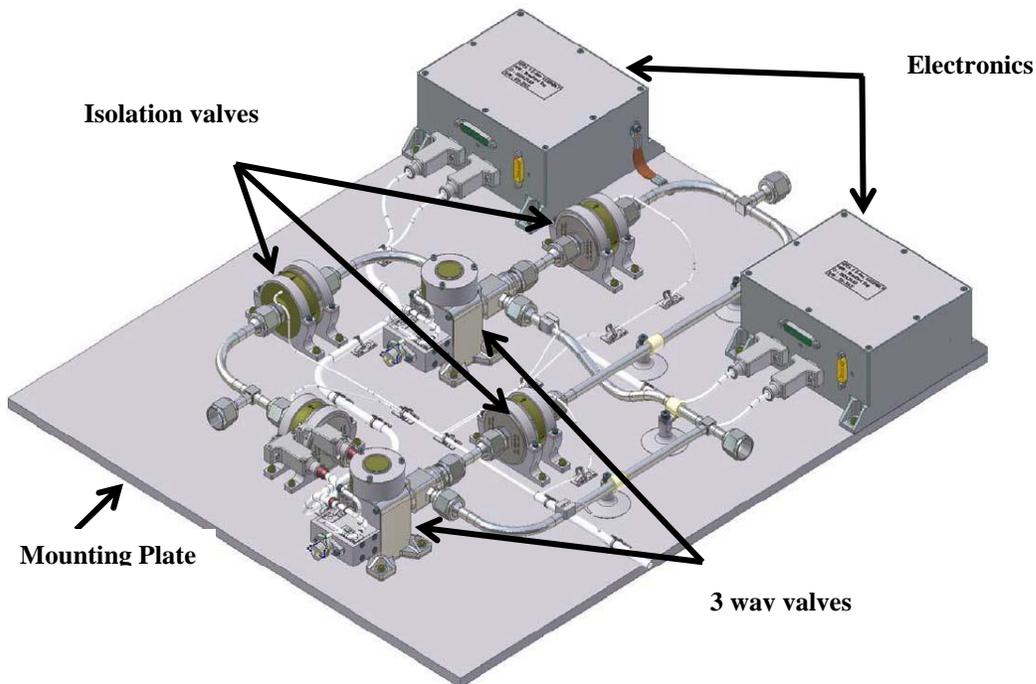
MPFL Bypass Assembly (715x600x90 mm)
